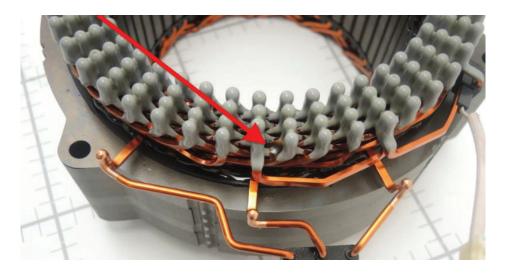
Toyota Prius Stator Stack Laser-Welded Seams
